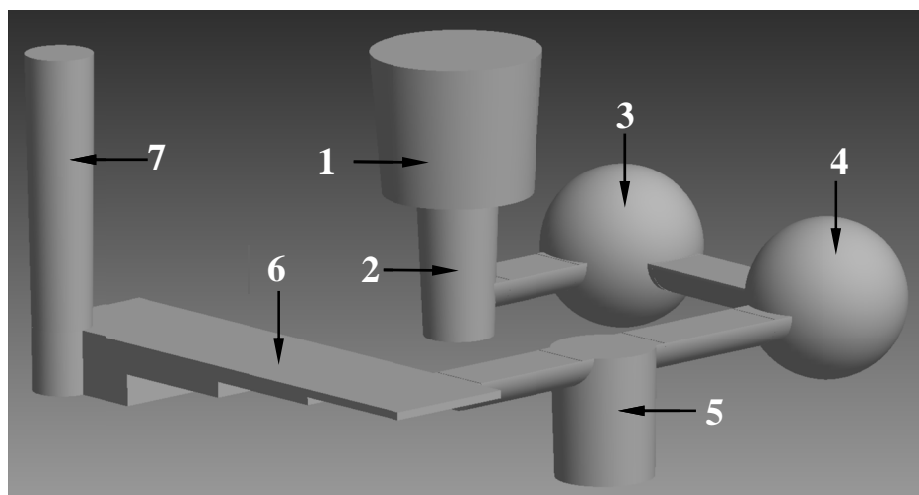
Schematic layout of elements in the mould: 1 – pouring cup, 2 – downsprue, 3 – reaction chamber, 4 – mixing chamber, 5 – control chamber, 6 – stepped test casting, 7 – flow – off
